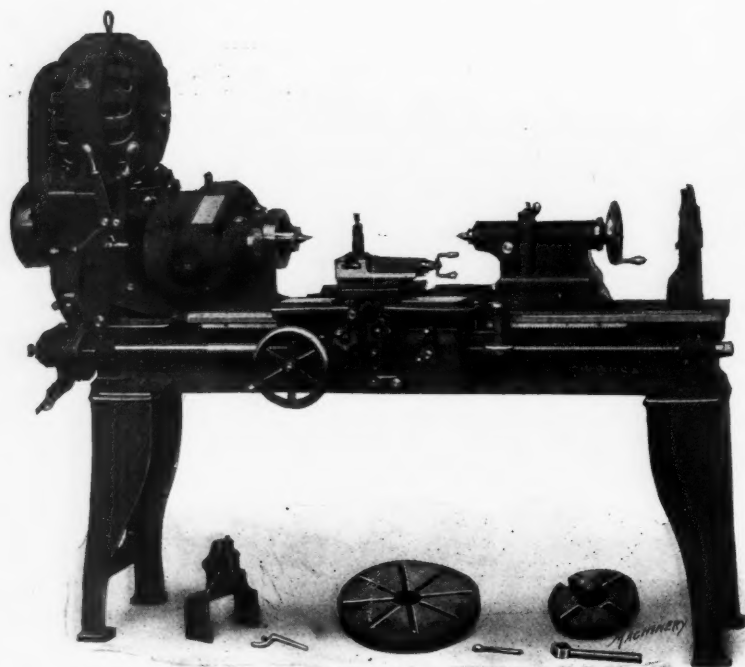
Lodge & Shipley 14-inch Selective Head Lathe
